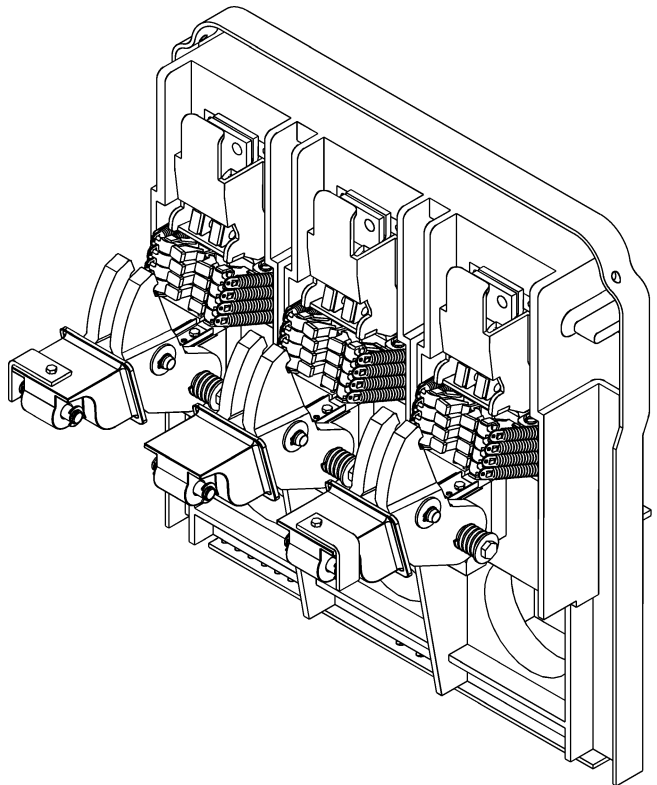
Back Frame assembly for WPX08, WPS16, WPF16, and WPH16.
